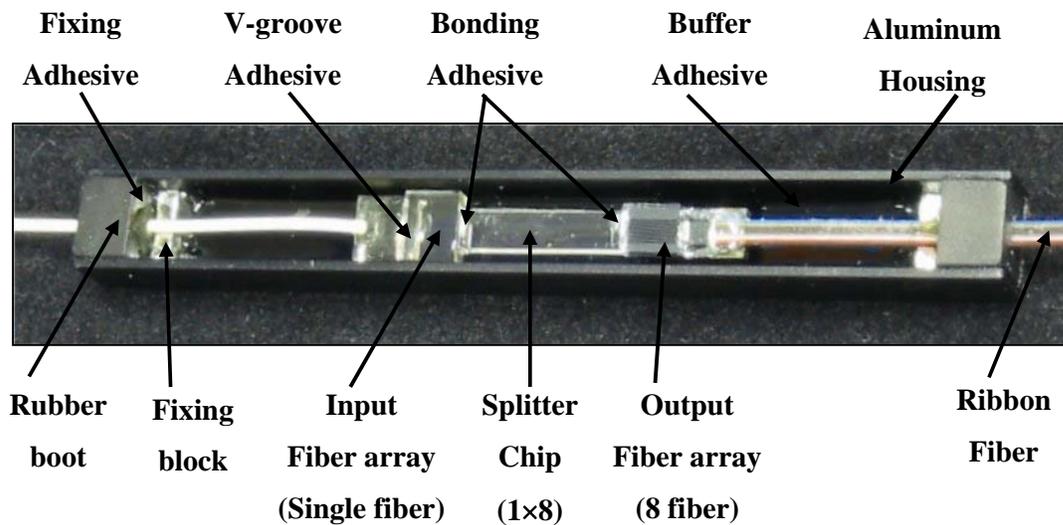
Appearance of a bonded PLC optical splitter packages in an aluminium packages.
